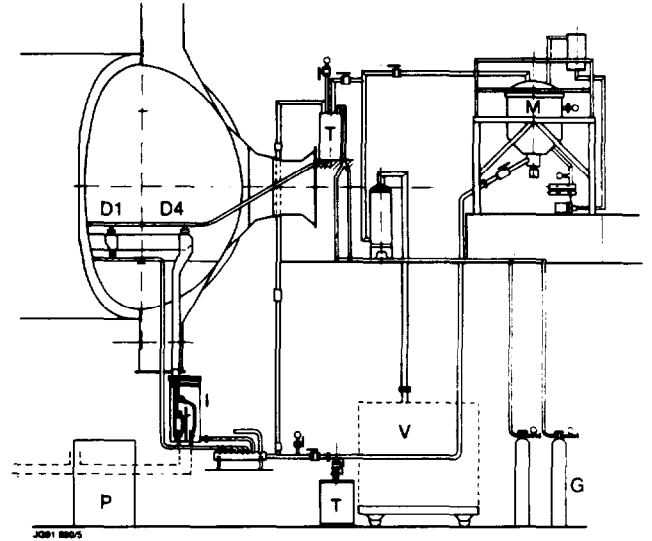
Layout of vacuum impregnation equipment showing coils (D1, D4), vacuum pump (V), gas supply (G), mixer tank (M), resin tanks (T), air filter (F), impregnation adaptor box (I) and coil heating power supply (P).
